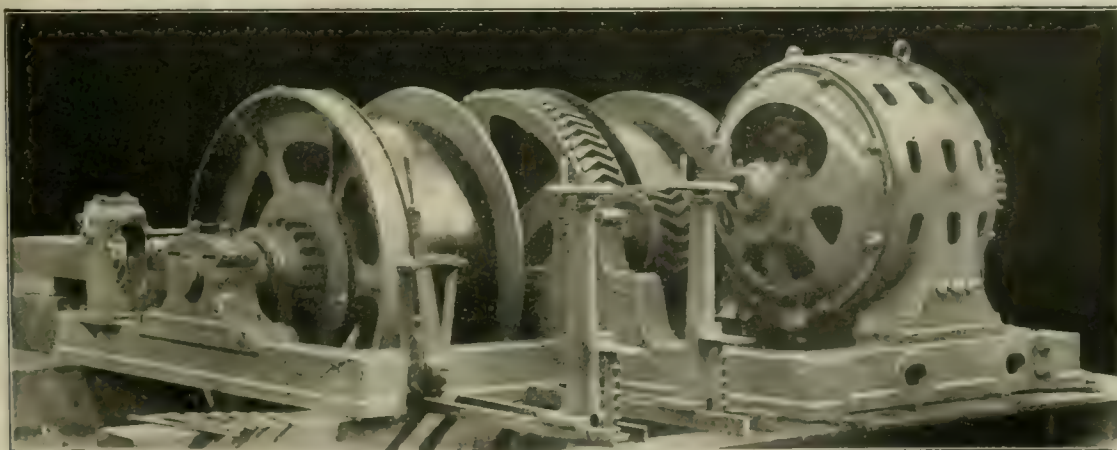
"SANDYCROFT" WINDING ENGINE.
